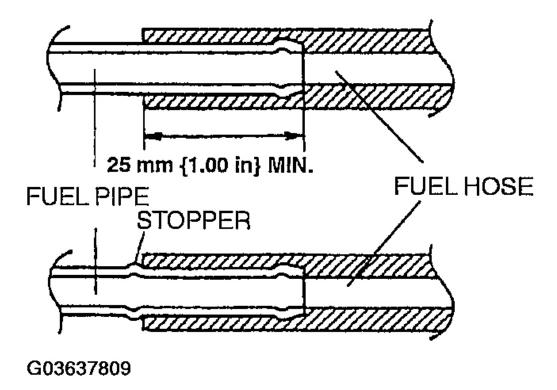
Installing Fuel Hose Onto Fuel Pipe Courtesy of MAZDA MOTORS CORP.
